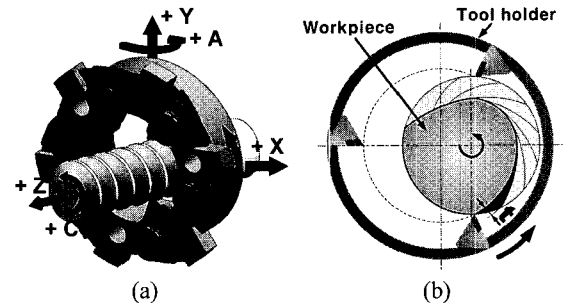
(a) Three dimensional view of planetary milling, (b) Chip generation mechanism of planetary milling
